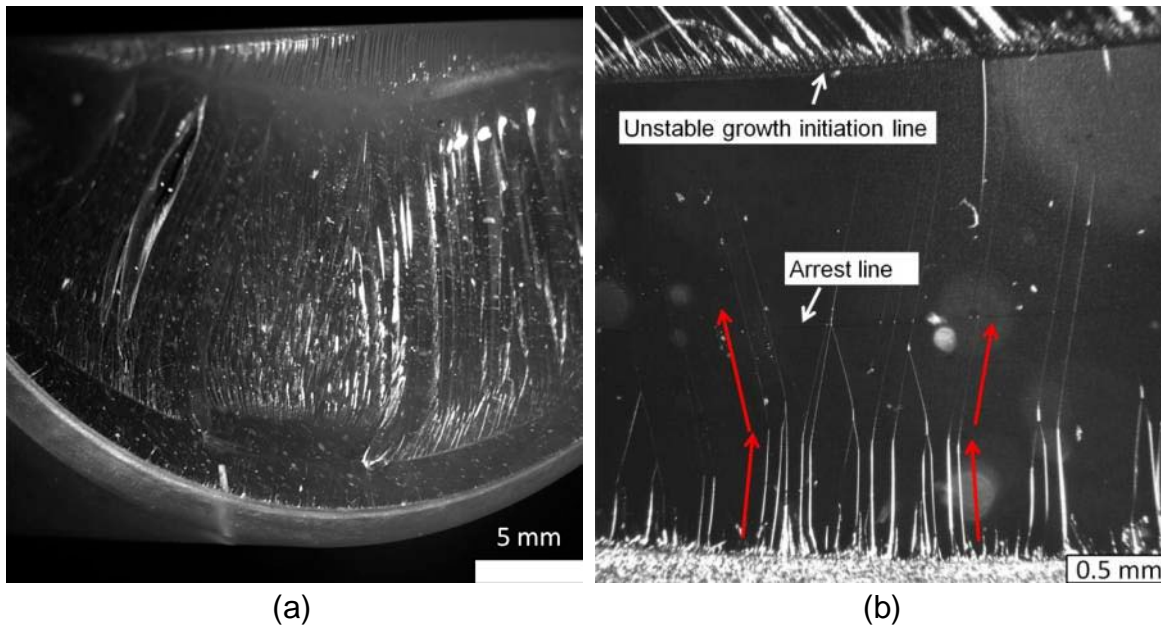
Images showing the fracture surfaces of MFG-3.
